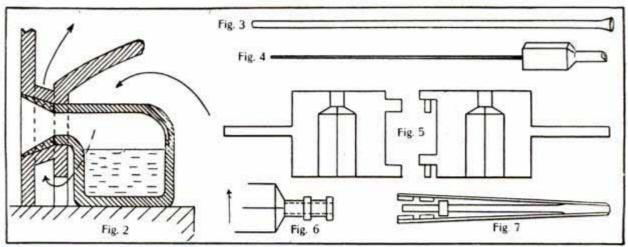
Single Pot in Pot Furnace. Fig. 3--Blower's Pipe. Fig. 4--Holder for Hot Bottles. Fig. 5--Die. Fig. 6--Neck of Bottle. Fig. 7--Tongs for Shaping Neck.
